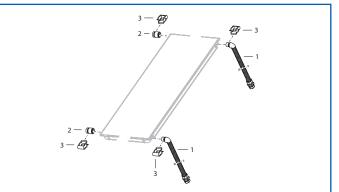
SKS4.0 rooftop/roof integration connection kit
